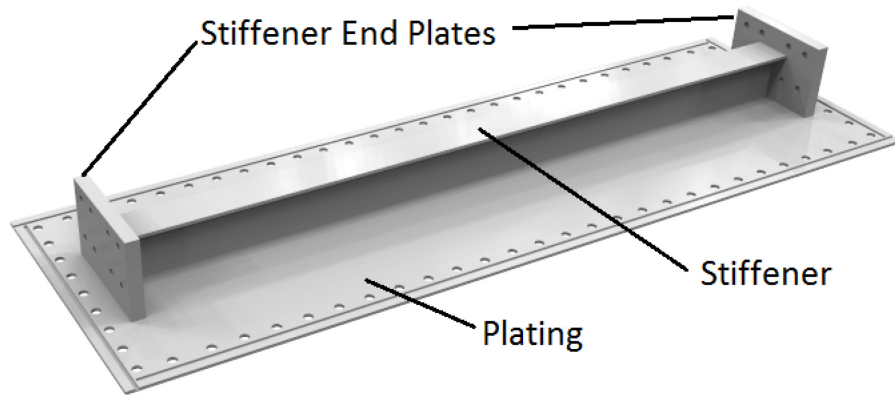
Frame test specimen showing plating, stiffener and stiffener end plates.
